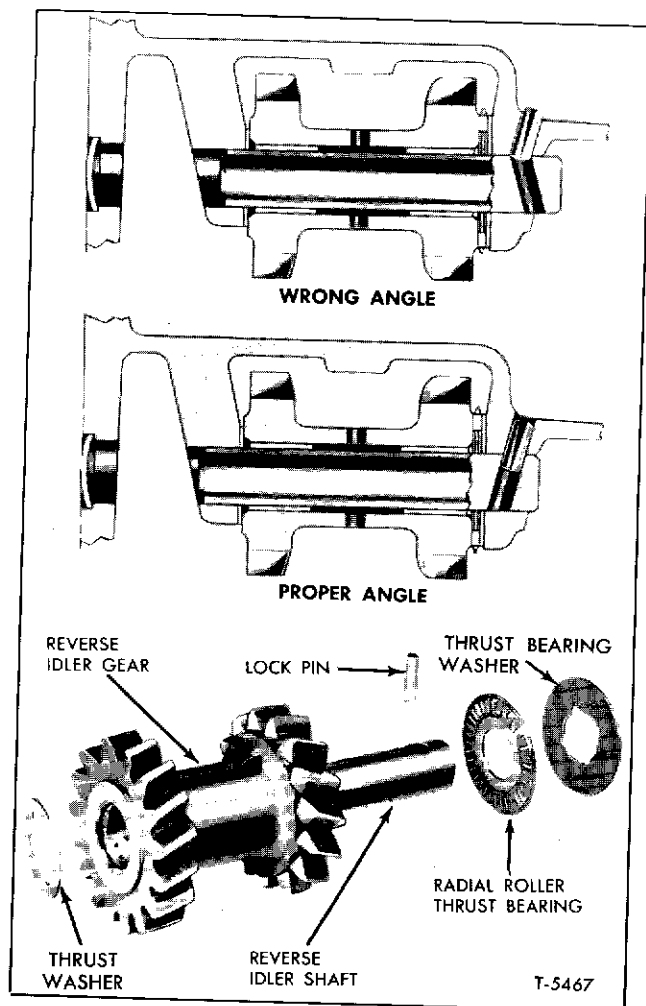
Reverse Idler Gear Shaft and Lock Pin
